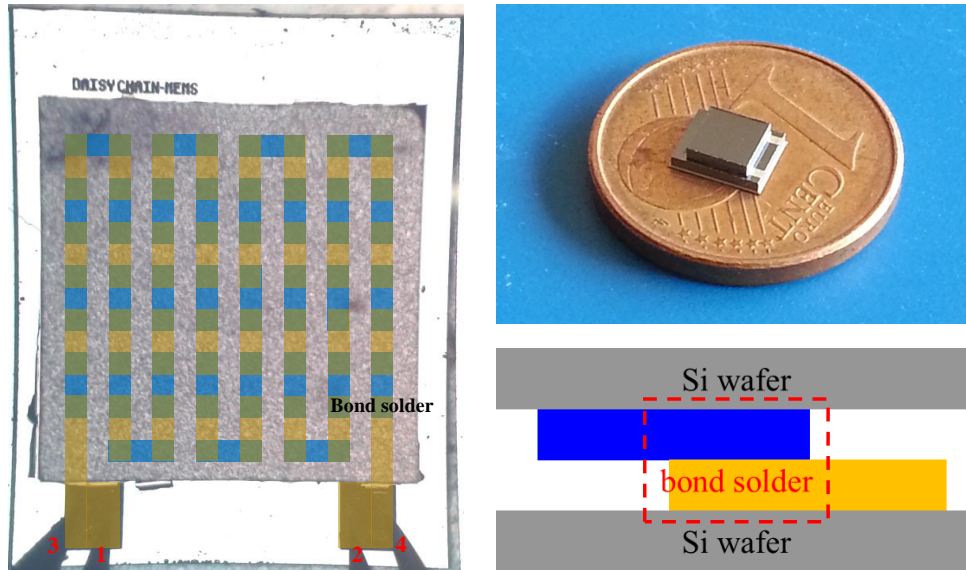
A daisy chain die (bottom-right), a schematic design of a daisy chain structure (*left*), a cross-sectional sketch of a solder contact (*bottom-right*), which is from the indicated inset.
